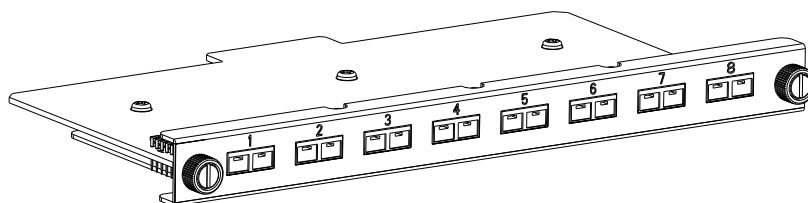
Sensing Module, Card Board Unit of Inserted 51101-64 Main Unit Frame
